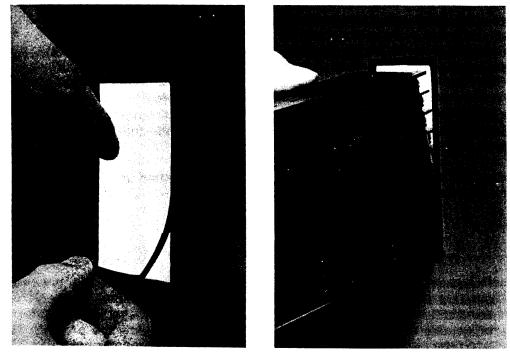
Remove the backing from the O-ring seal. Apply the seal around the panel cutout on the outside of the panel.
